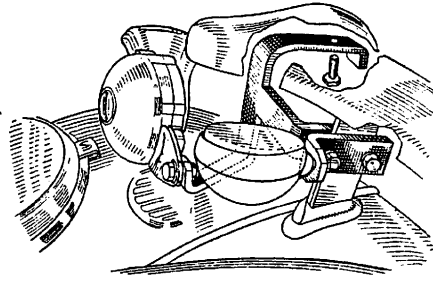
Attachment of a holder as shown in Fig. 4 to the bumper bar
